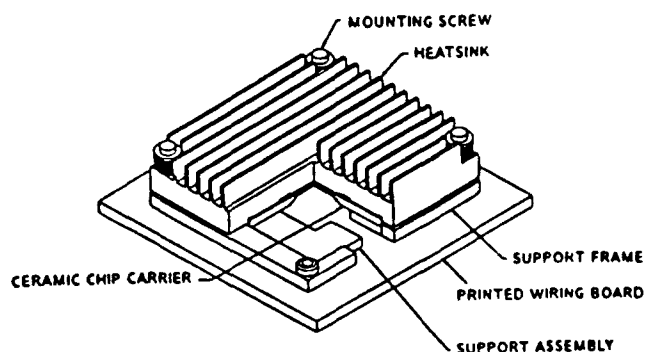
Cutaway view of a VLSI package/heatsink configuration.
